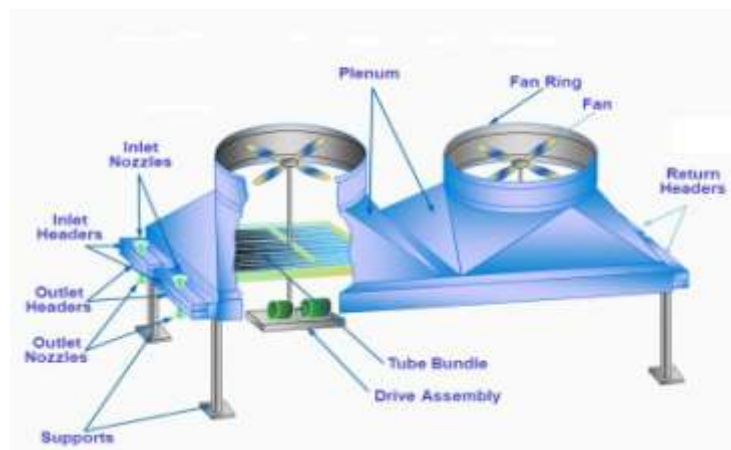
3- Dimensional view of Drive Part of ACHE.
